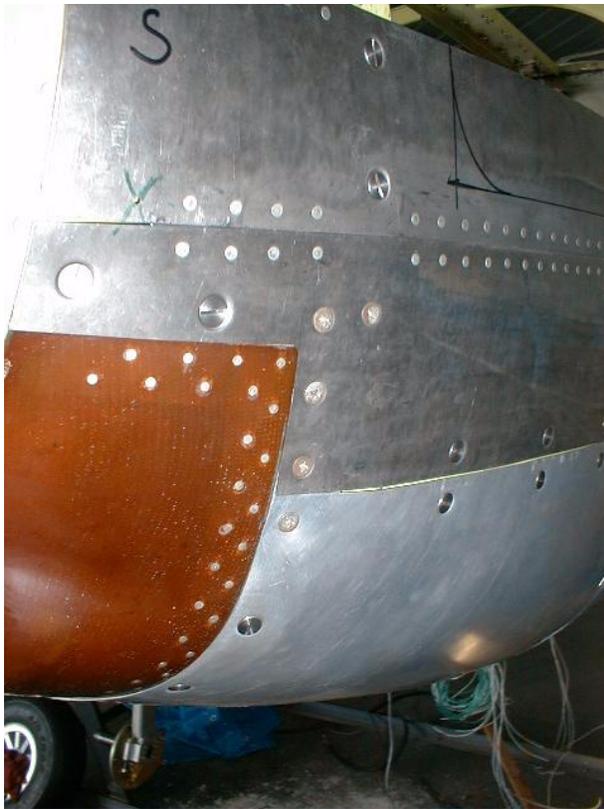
There will probably not be enough room to install Dzus fasteners just aft of the chinscoop. There 1/4-28 screws are used instead.
